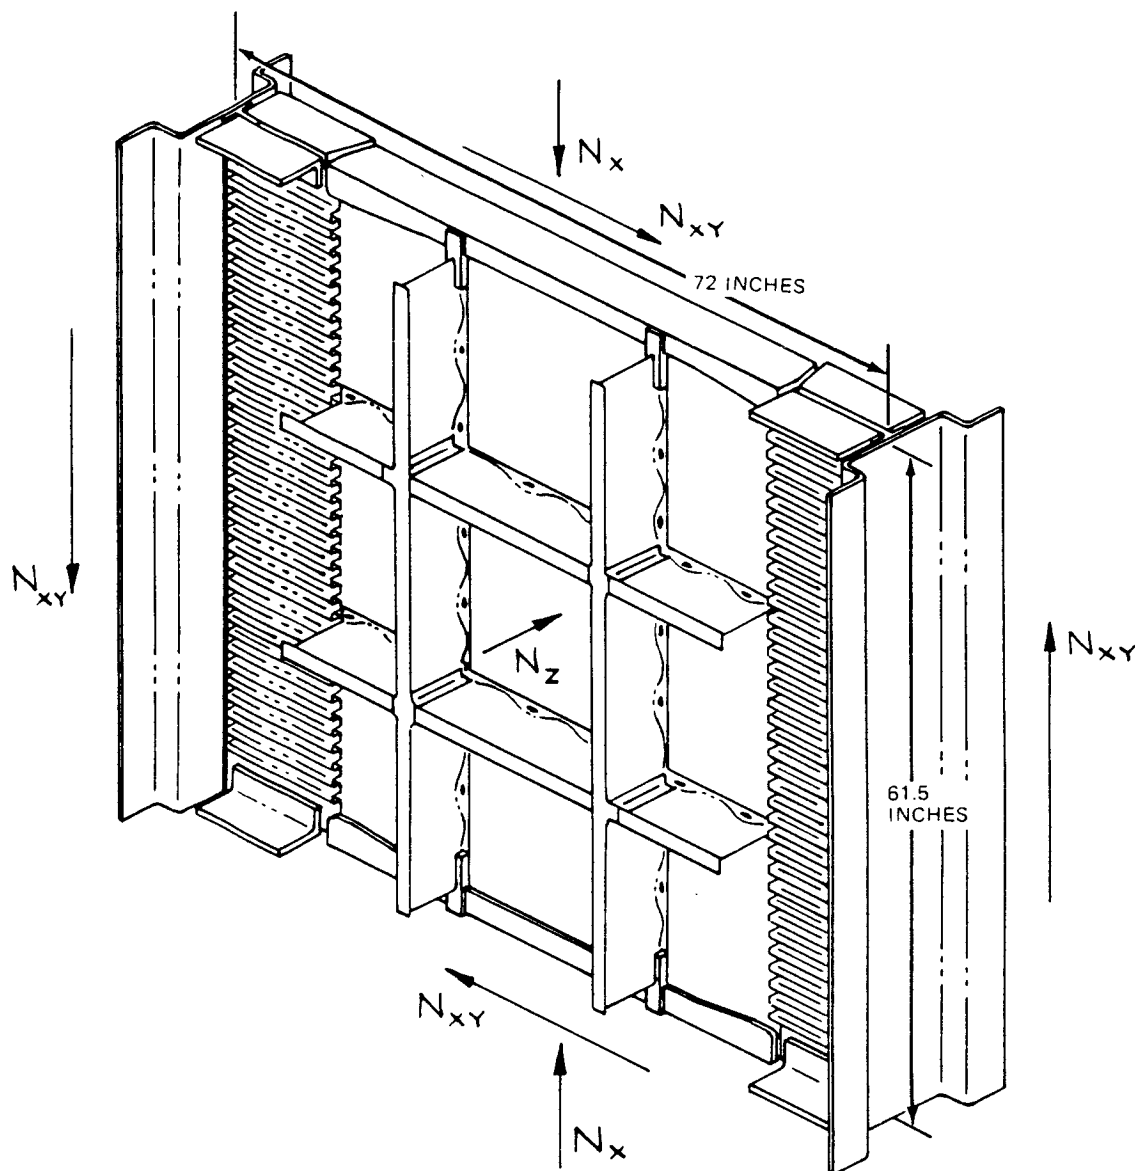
Z5943445 COVER PANEL COMBINED LOAD TEST SPECIMEN
